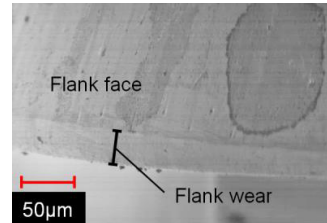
Scanning electron microscopy image of the end cutting edge after machining 40 holes in conventional helical milling
